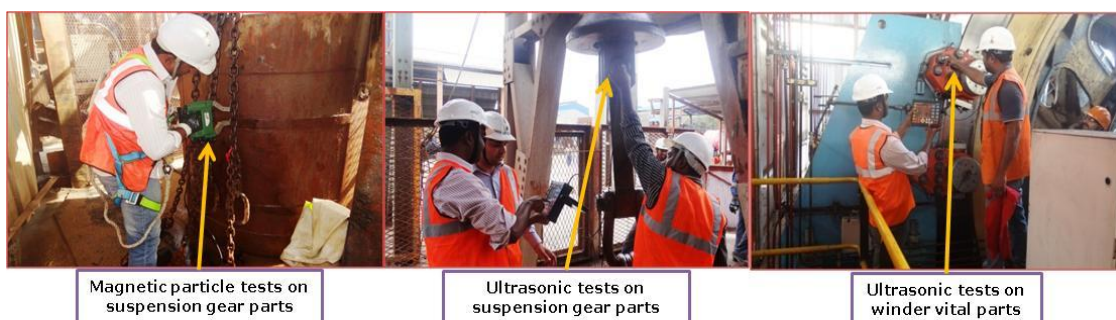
NDT on winder vital components & suspension gear parts, M/s SSM
